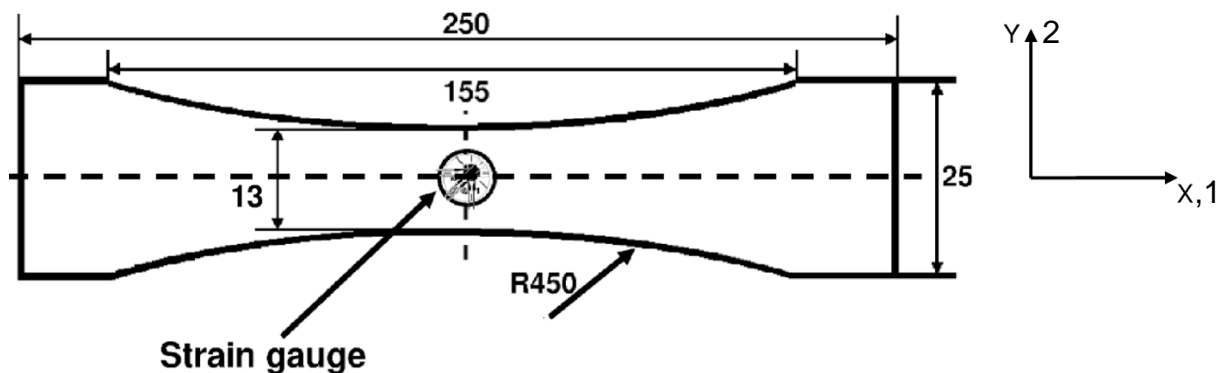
Test Specimen Geometry and Strain Gauge Positions for Tensile Test
